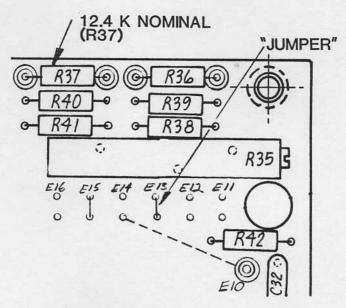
Location of Frequency Correction Compensation Jumpers on Synthesizer Board Assembly.
